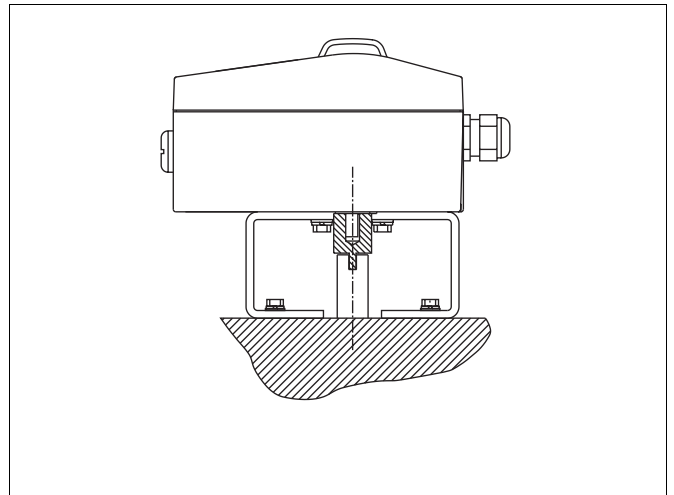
Mounting to rotary actuators to VDI/VDE 3845
